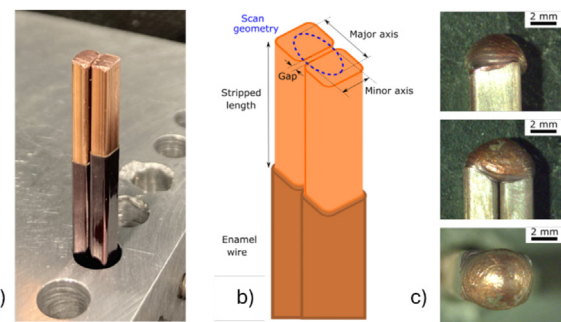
a) Hairpin couples prepared for welding showing the stripped region and the cut flat surface. b) Schematic description of the weld scan trajectory in laser welding. c) The morphology of the weld bead.
